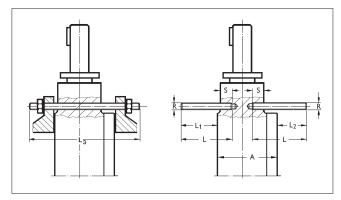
Stud bolt mounting dimensions, mounting options SB, BH
